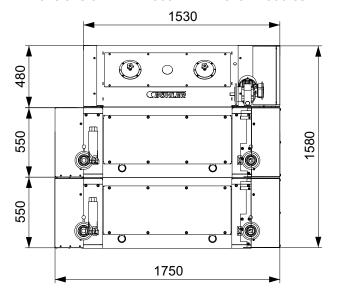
Dimensions of DFZL-1000 with 1 roller module
